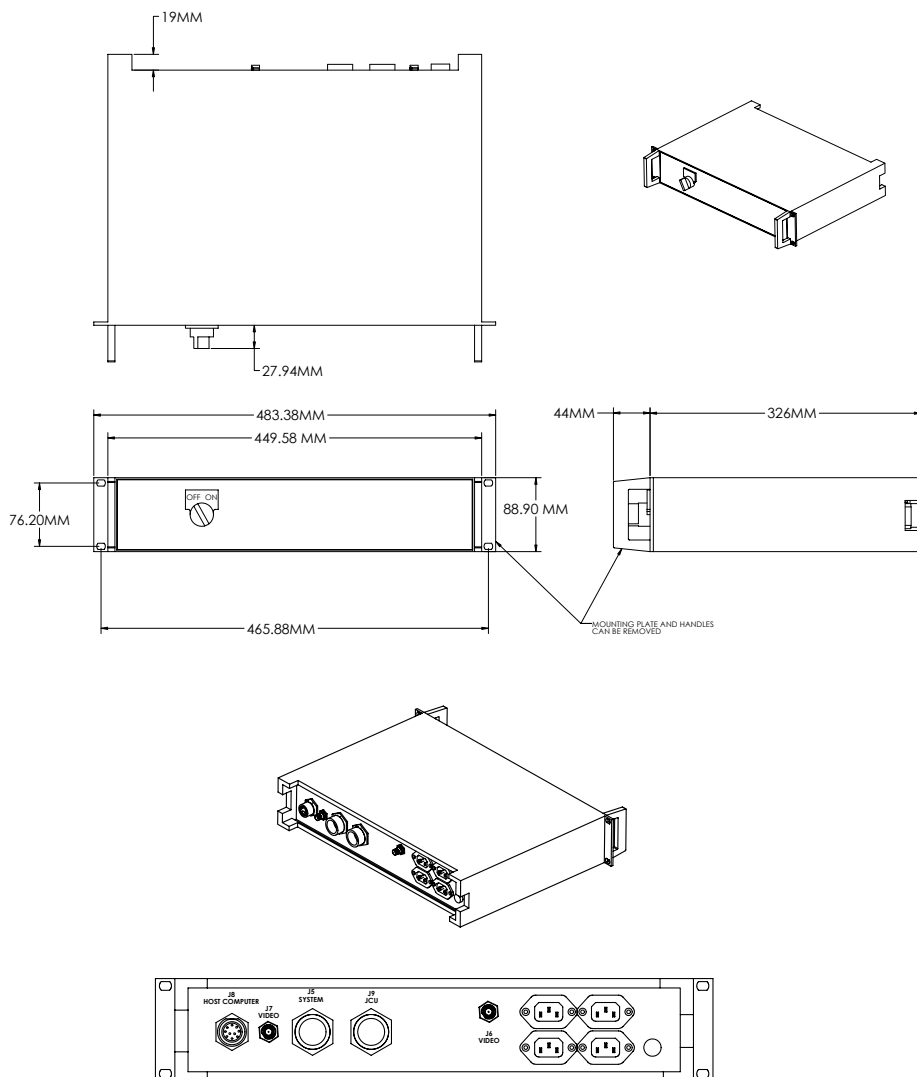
Basic dimensions – Power box (Basic dimensions in mm).
